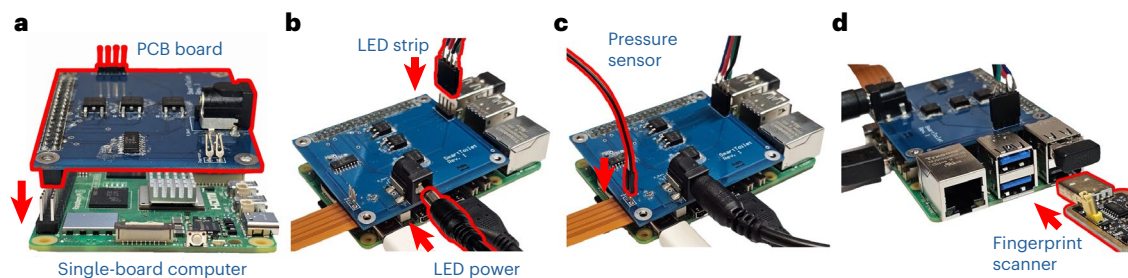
| Assembling the PCB board to the single-board computer. a, Mounting the fabricated PCB board onto the single-board computer via the GPIO headers. b, Connecting the LED strip to the four-pin connector and the LED power source
